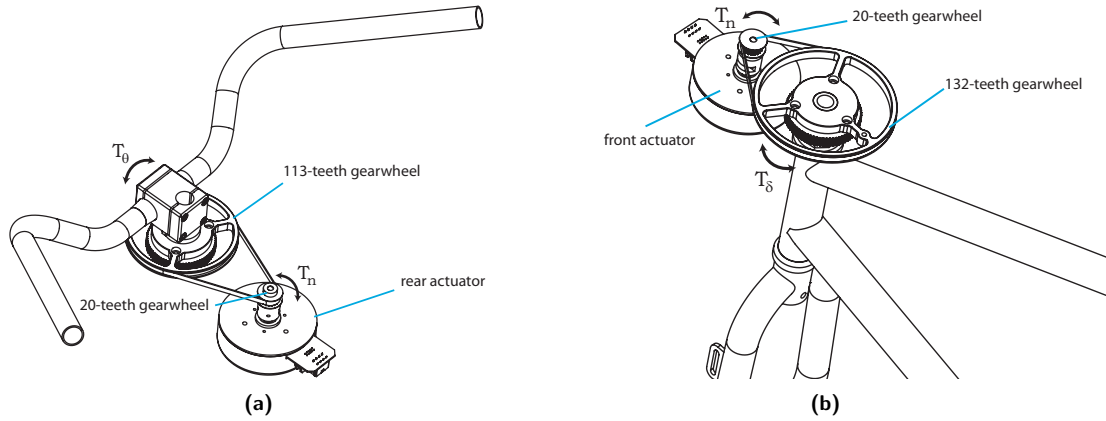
The decoupled handlebar assembly (a) and steering assembly (b) on the bicycle showing the actuator positioning driven by a timing belt construction.
